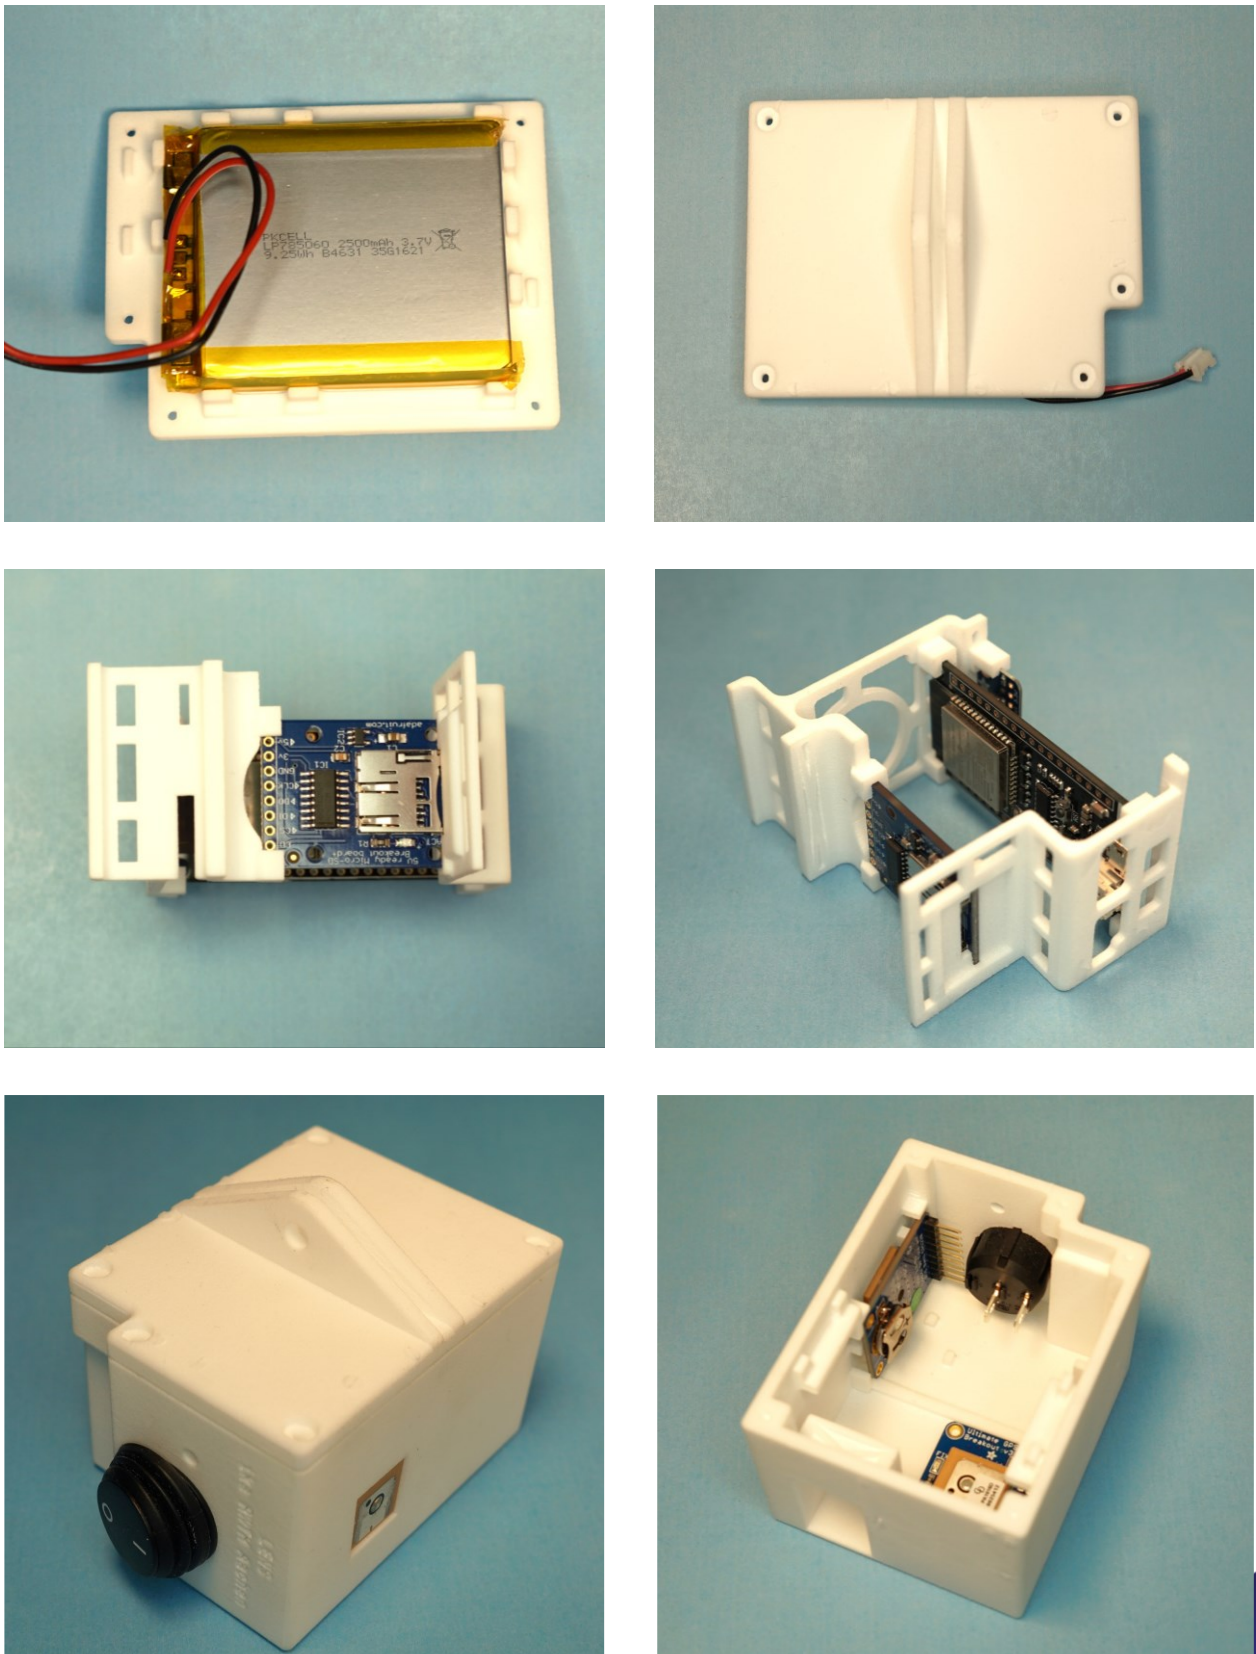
Top: Front / Back view of the cover; Middle: Internal framework; Bottom: Closed and open housing
